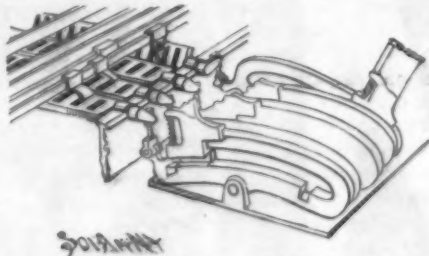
DETAILS OF INTERLOCKING MECHANISM.
